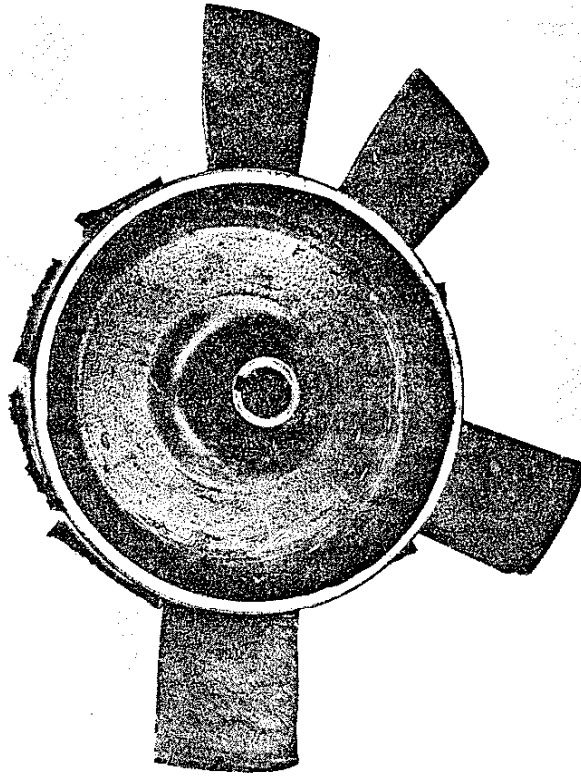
Fatigue Failures of Blades on Cast Magnesium Fan.
